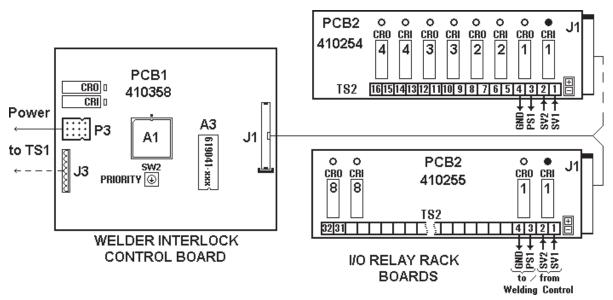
Connection of Welder Interlock Board to Relay Rack Board
